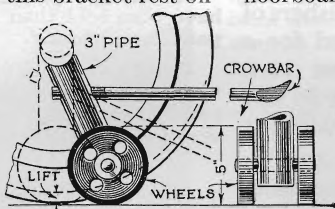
Simple jack made of an old crowbar, a bolt and pulley wheels
